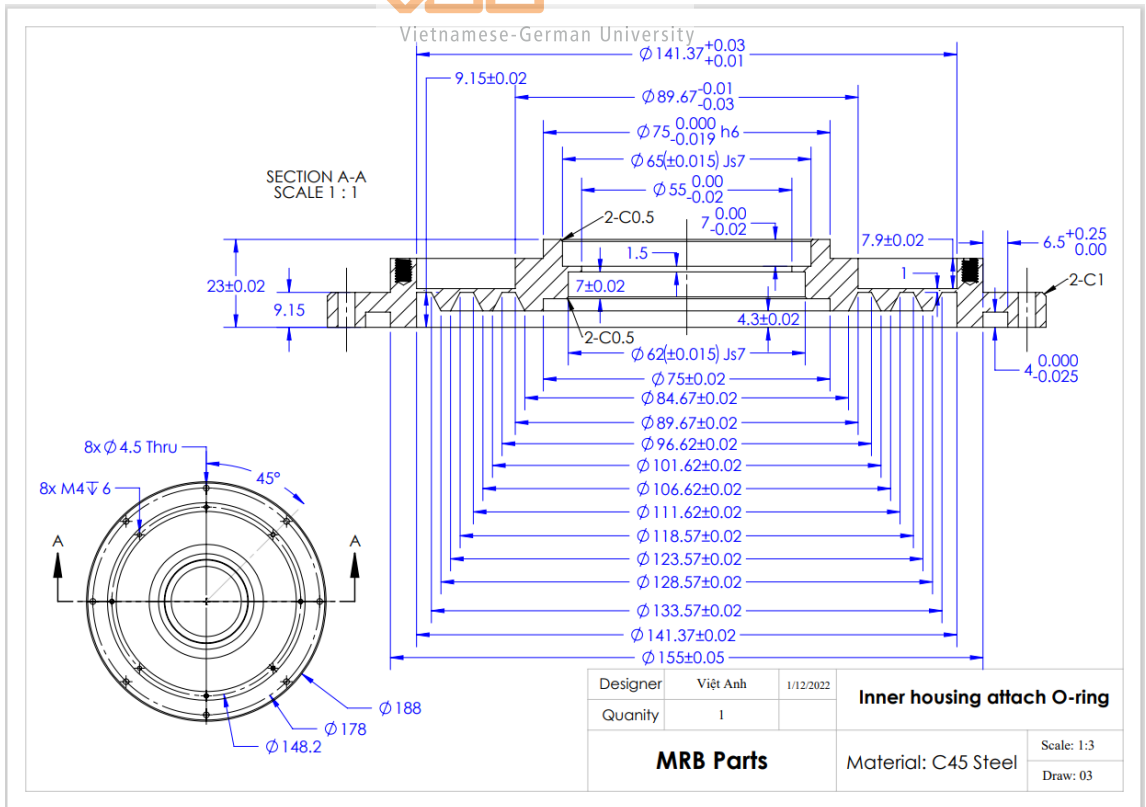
2D drawing of half of inner housing which attach O-ring
